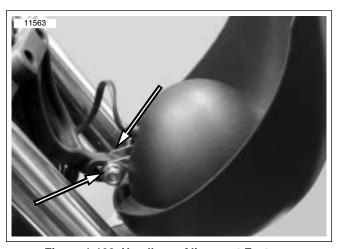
Headlamp Alignment Fastener (VRSCD)
